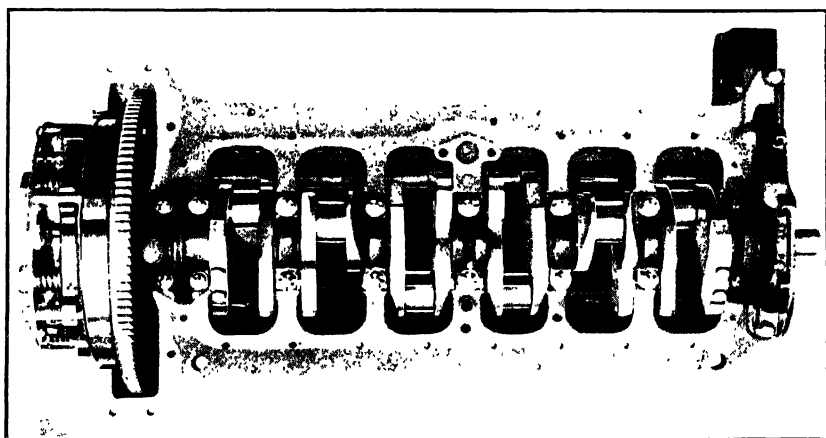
Crank Case Removed, Showing Bearing Caps.
